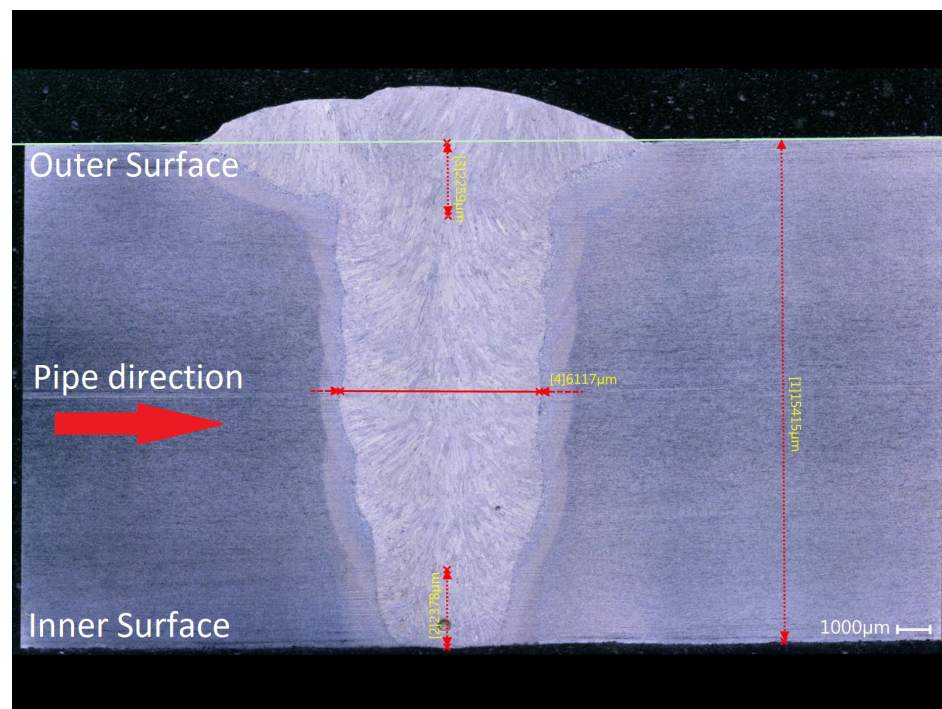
Weld macro overview of the girth weld including measurements of the wall thickness, weld thickness and thicknesses of the first and last weld passes.
